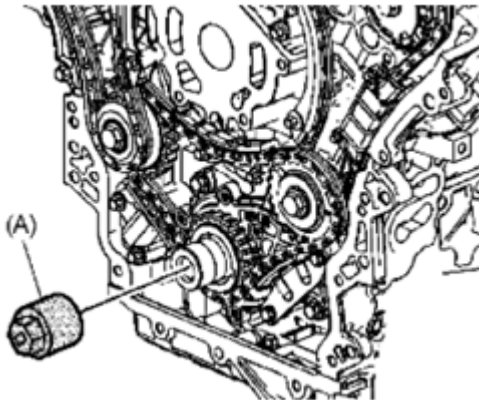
Holding Camshafts (Bank 2) With Special Tool
